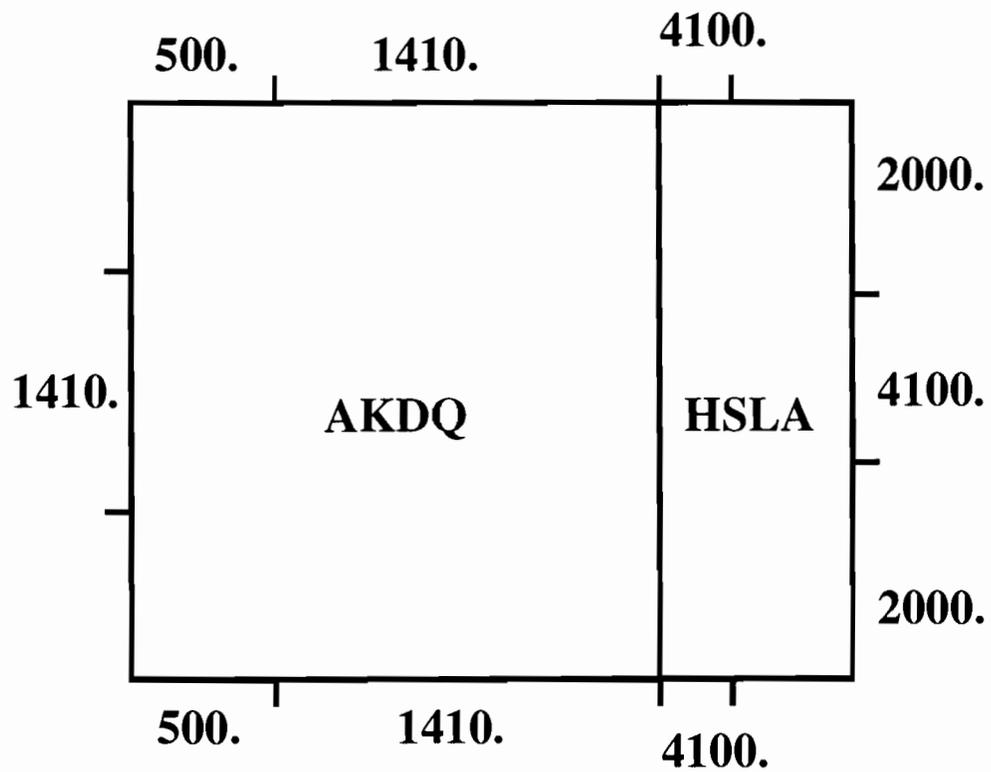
The restraining forces used for the blank with the weld 2" from center, dry conditions calculated based on Stoughton's drawbead model and binder force.
